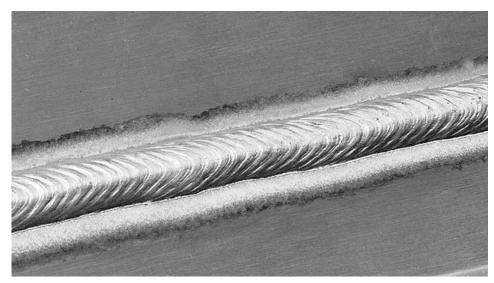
A weld in 3 mm aluminum made using Pulse On Pulse welding.
